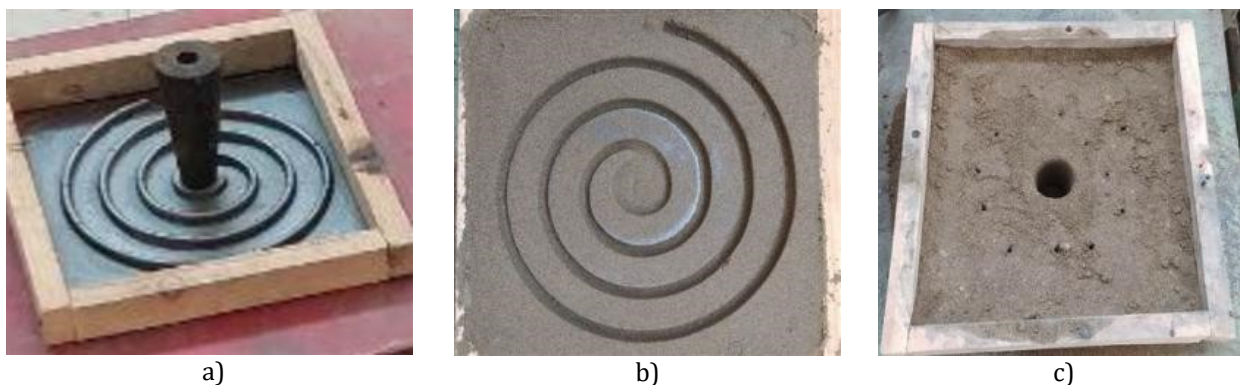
A mold made using a spiral model to determine the ductility of modified gray cast iron a) model ready for ramming with sand b) the inner part of the mold based on the prepared spiral pattern c) mold ready for casting.
